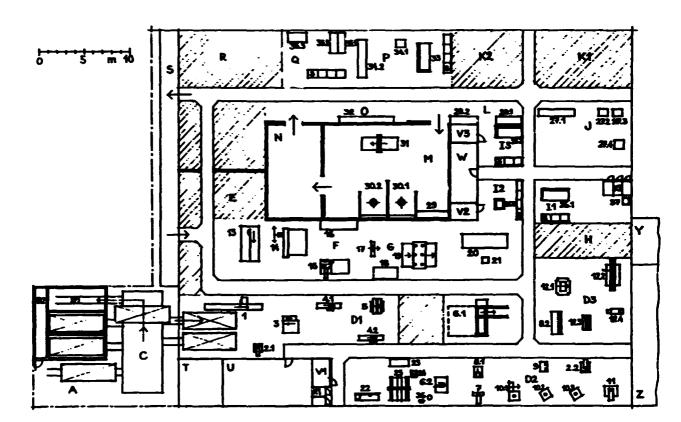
Plant layout for a small furniture factory producing only solid-wood furniture
